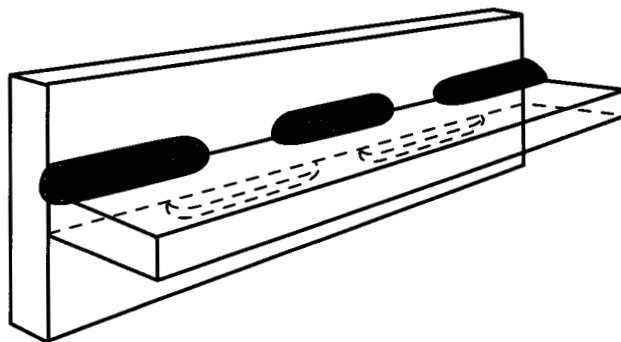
Staggered Intermittent Fillet Weld
